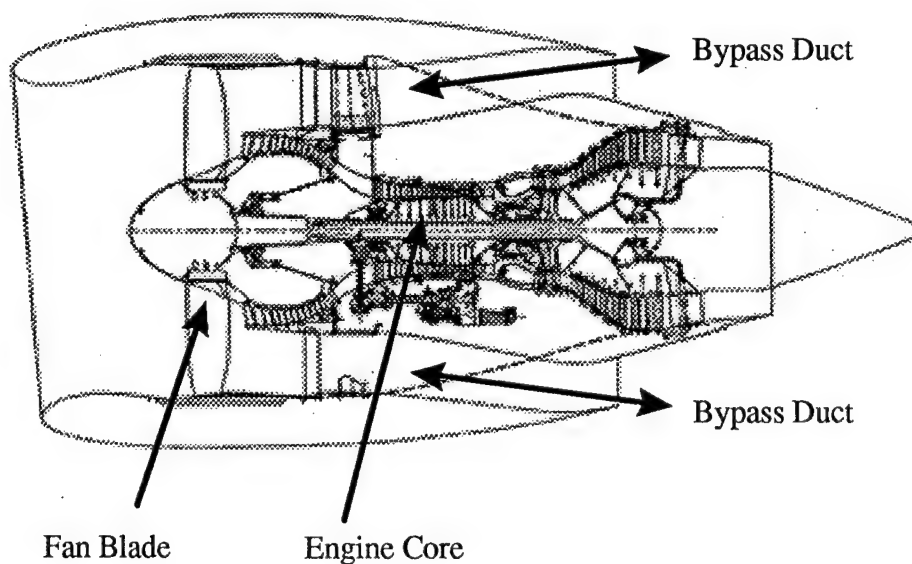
Cross-Sectional View of a High Bypass Turbofan Engine
